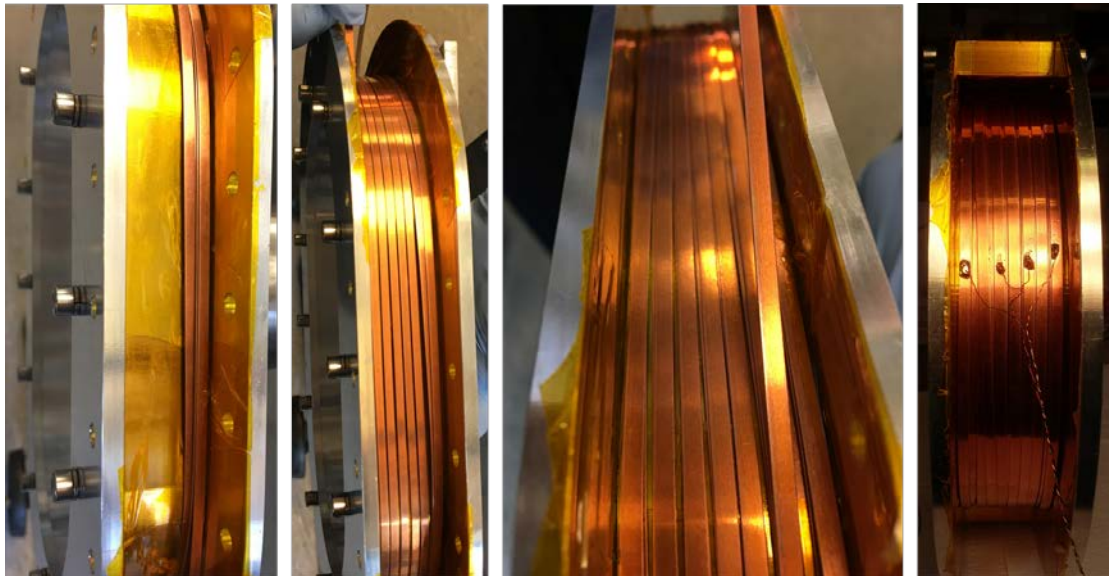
Winding of 3 layer coil. From left to right: Winding of 3 turns at side, winding first layer side ways, winding second layer side-ways, final 3 layer with voltage measurement wires soldered to the MgB<sub>2</sub> windings.
